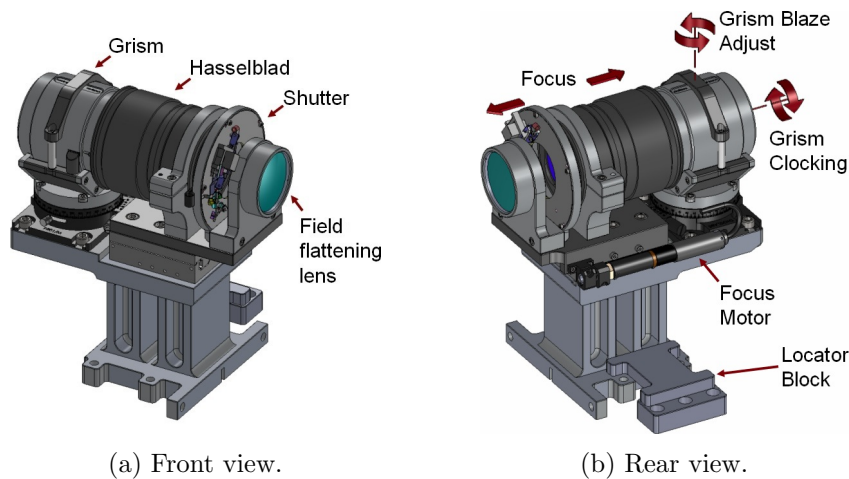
The camera arm mount for the vacuum chamber prototype.
